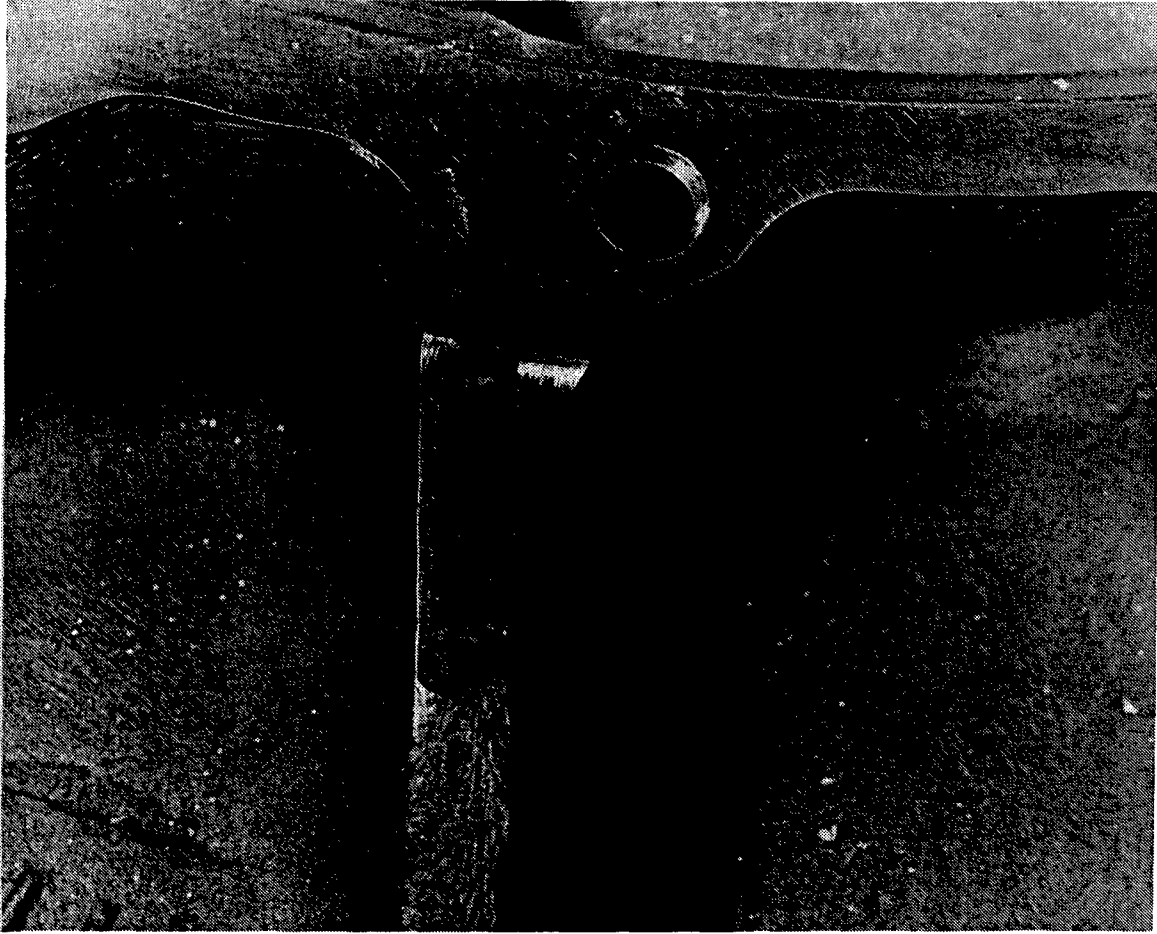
P/N 3-500-262-08, Rear Header After Deburring
